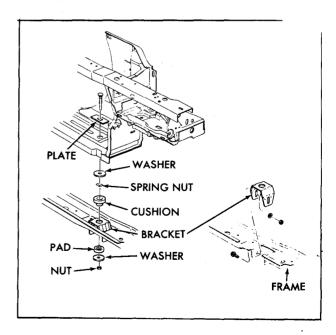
Radiator Cradle Mounts—Eldorado
